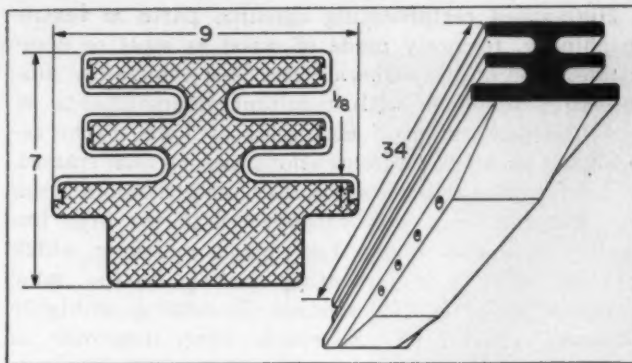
Lightweight locomotive crosshead shoe, machined from an extruded aluminum shape, reduces unbalanced reciprocating weight
